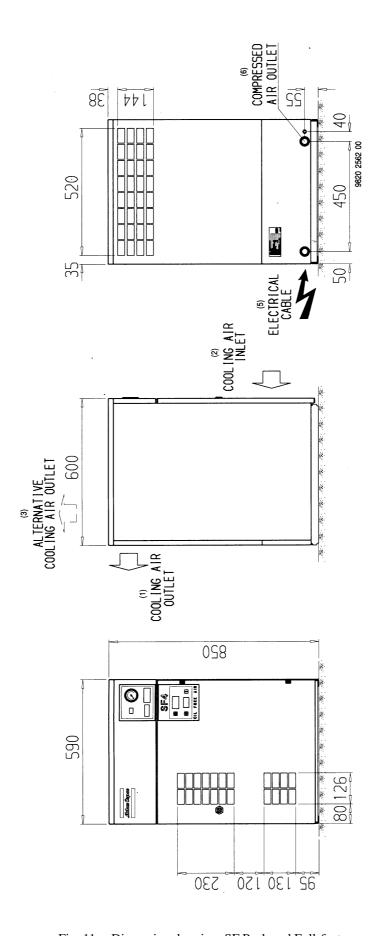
Dimension drawing, SF Pack and Full-feature
